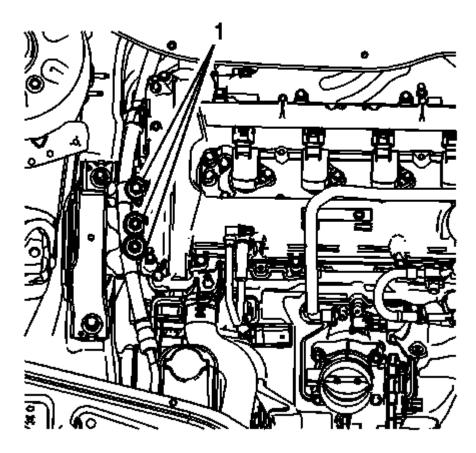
Exhaust Camshaft Position Actuator Solenoid Valve & Bolt Courtesy of GENERAL MOTORS COMPANY
